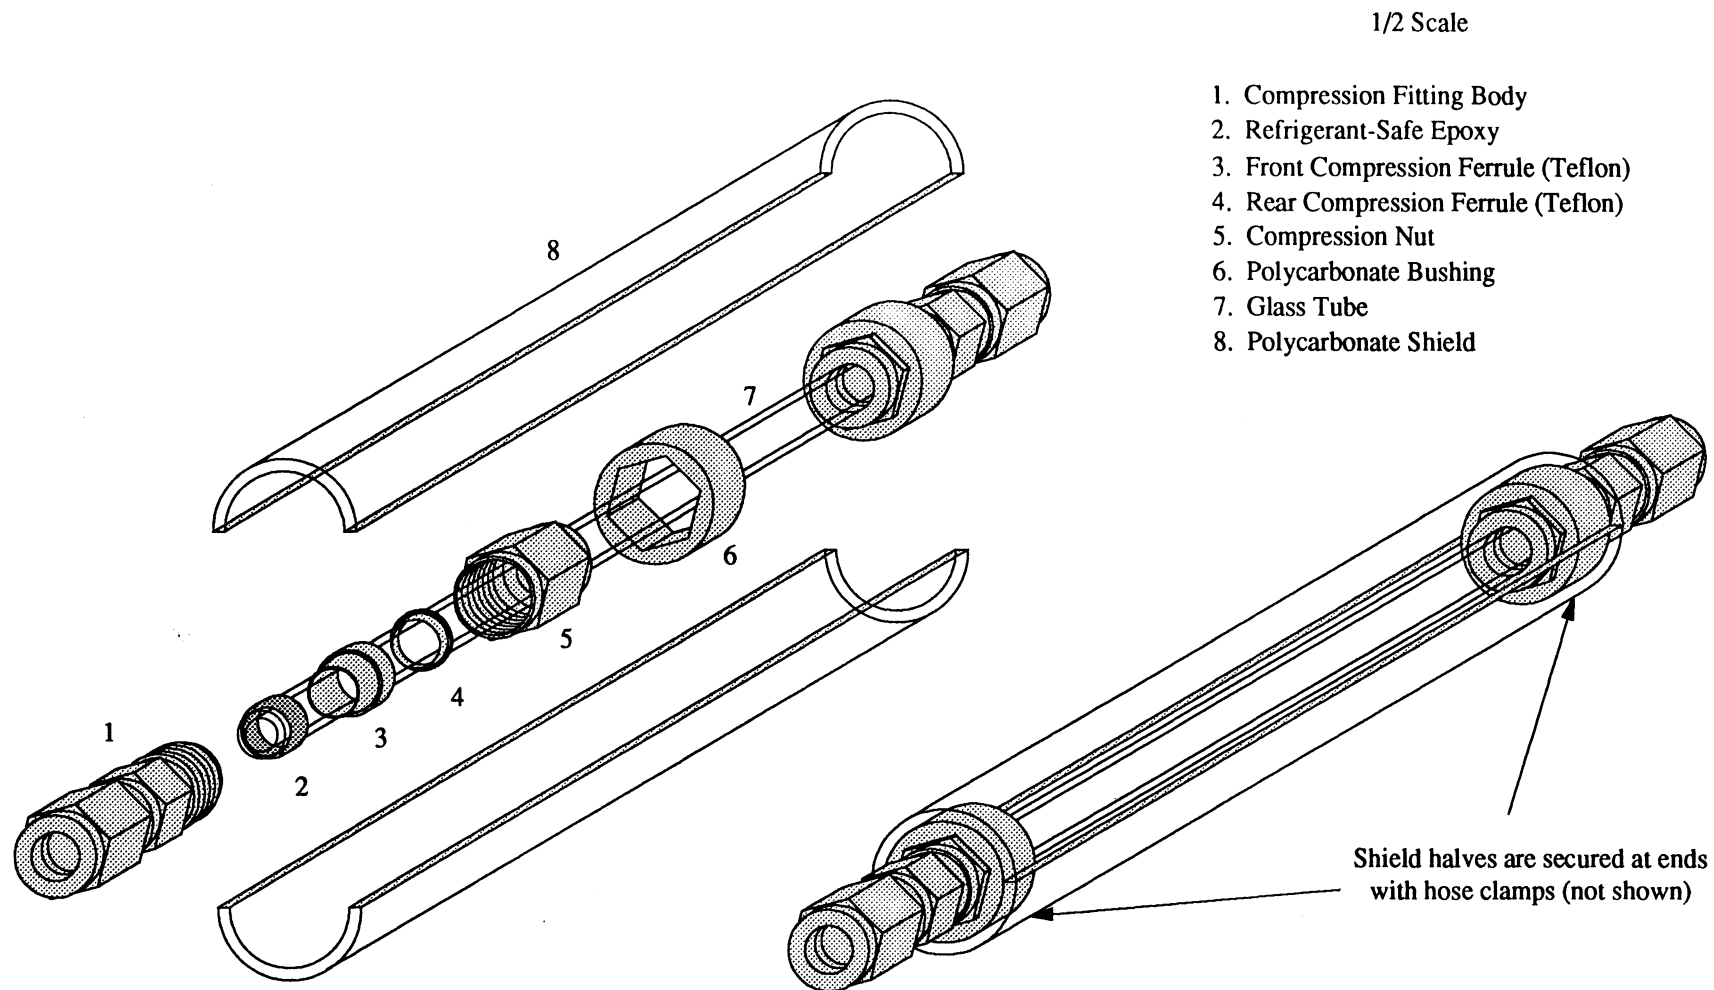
A typical sight tube assembly (1/2-in. O.D. line size shown).
